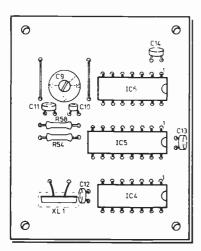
Crystal Timebase board PCB4 component layout. Note that the crystal is fixed to the board by double sided adhesive tape
